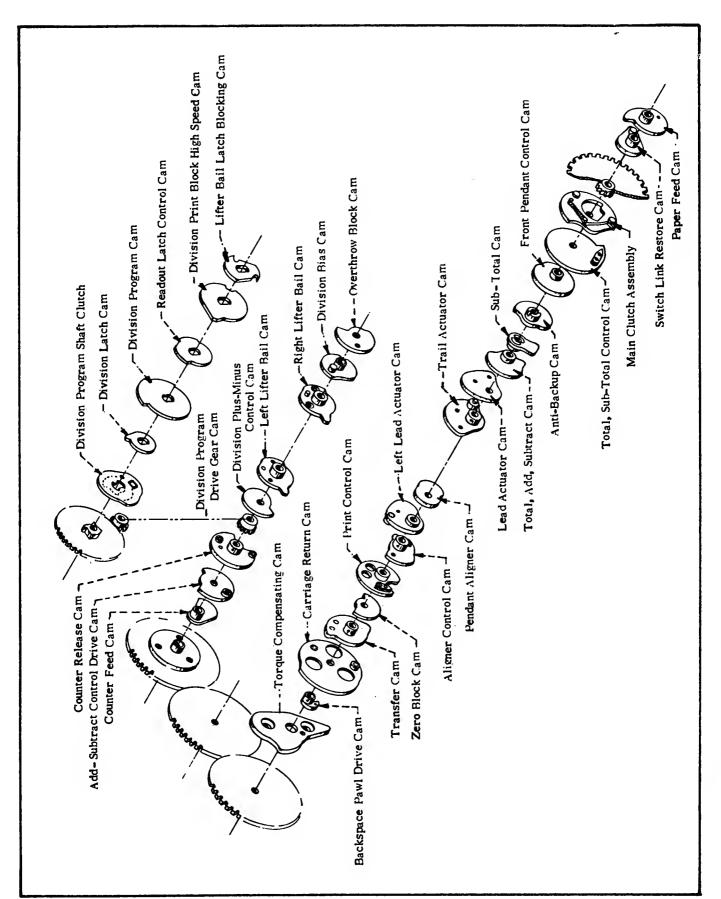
Motor Driven Cams Which Control the Operations of the Printing Calculator.
